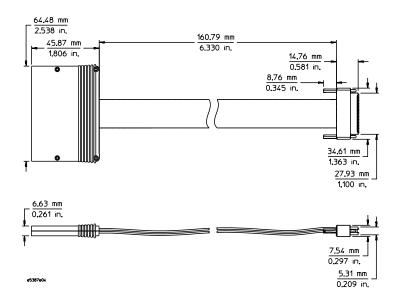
Soft touch probe (E5387A and E5390A) dimensions
